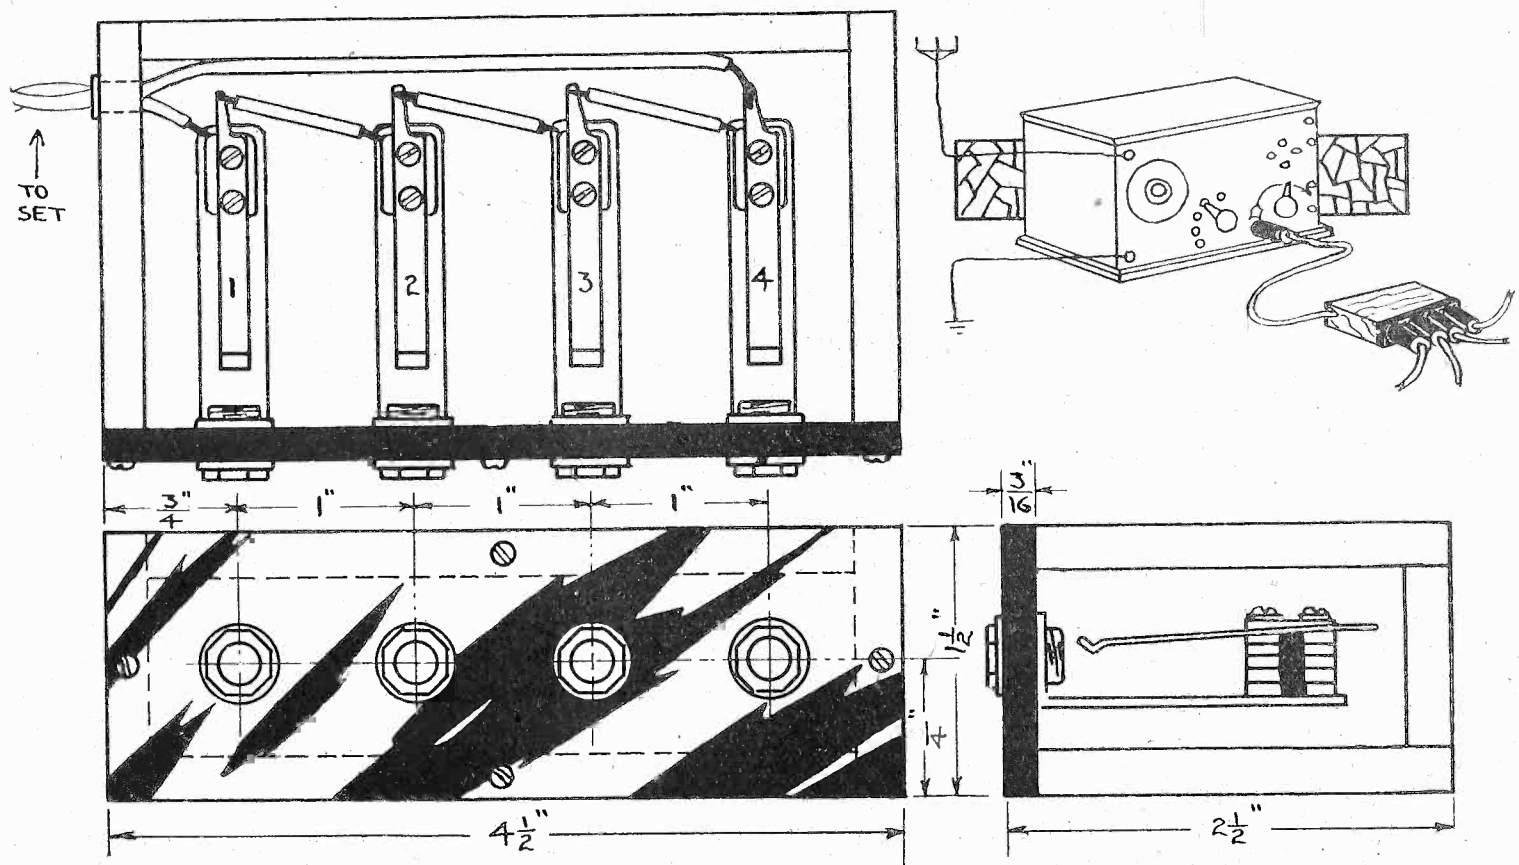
Layout for making a multi-jack to accommodate four headsets.
